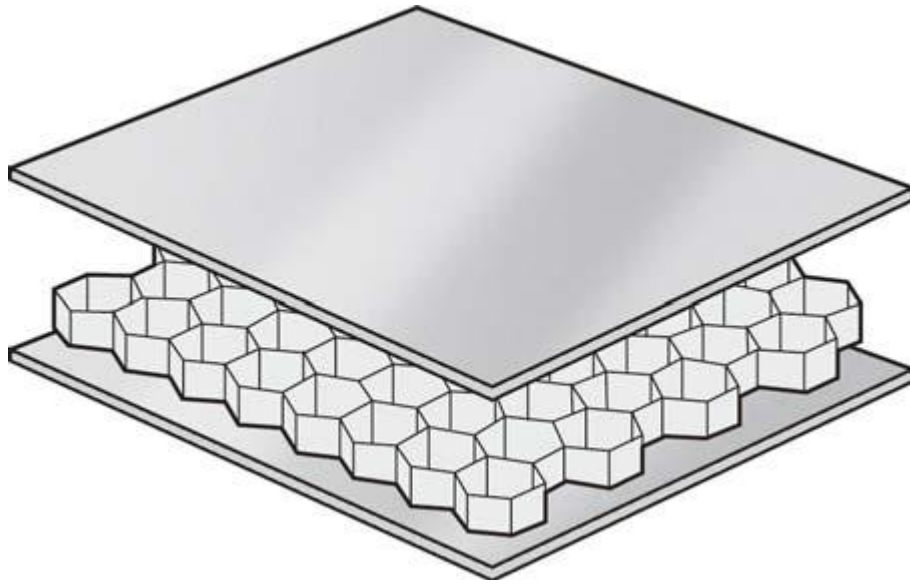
An exploded view of aluminium honeycomb (Ayres Composite, 2007)
